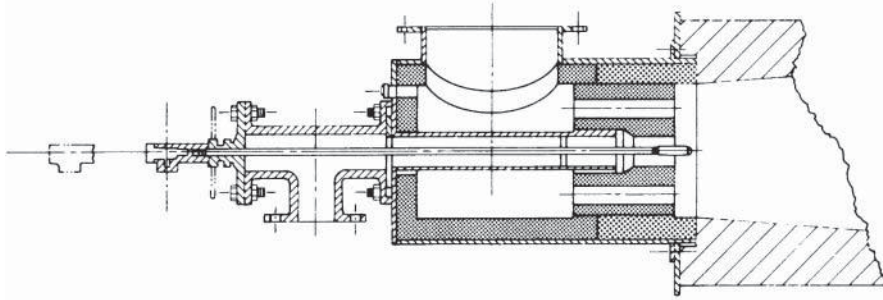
Dual fuel burner with removable oil nozzle.^a Courtesy of Bloom Engineering Company.
